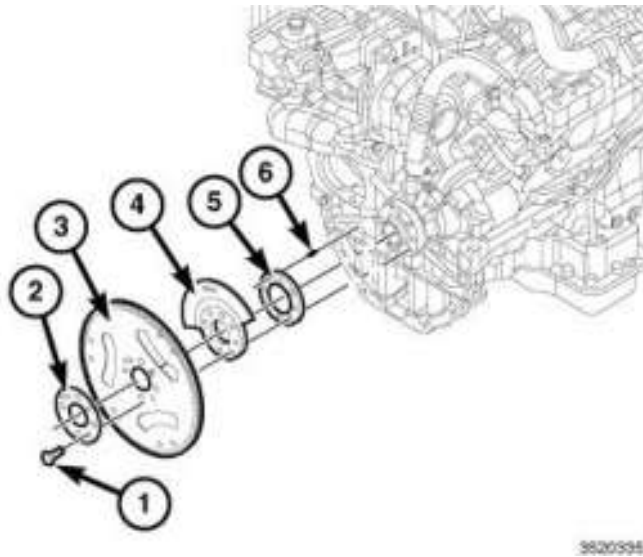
Flex Plate, Counter Weight, Tone Wheel & Bolts
